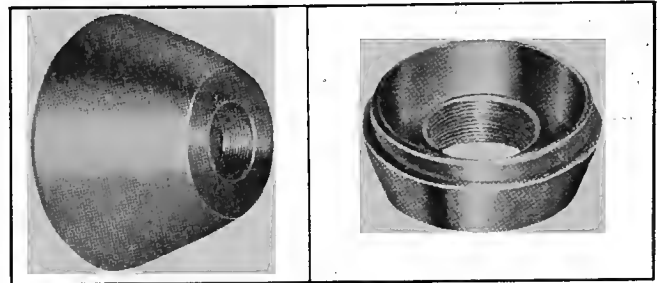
3.8-IN. AND 6-IN. SHRAPNEL HEADS
